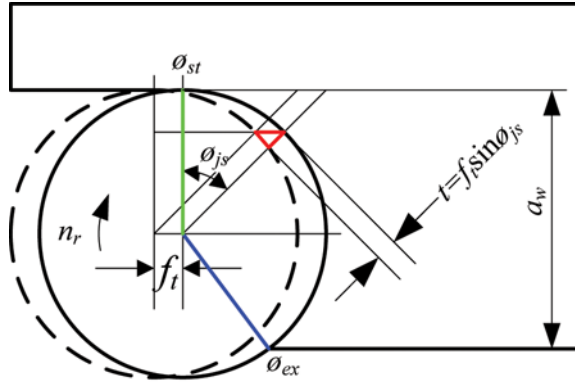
Geometric model of end milling cutter. (Figure available in color online.)
